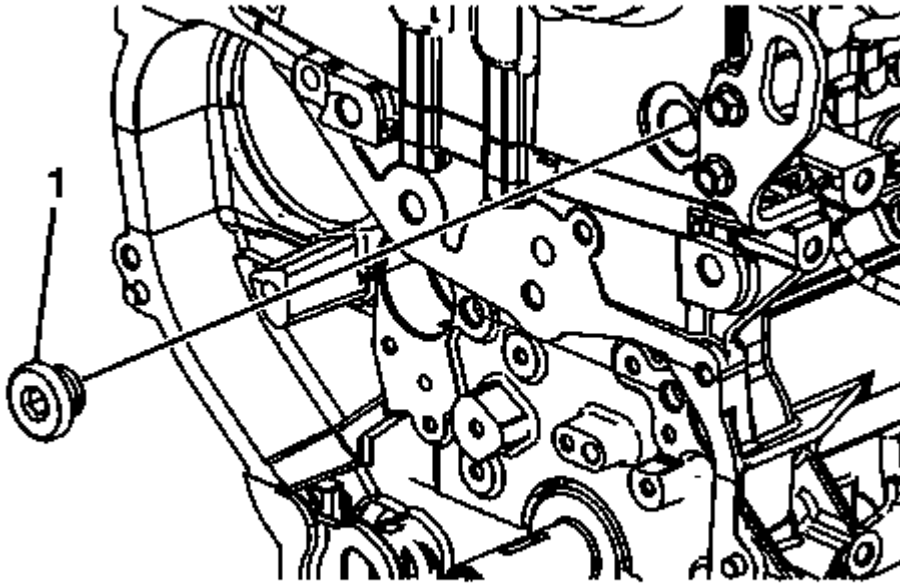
View of timing Chain Guide Bolt Access Hole Plug
